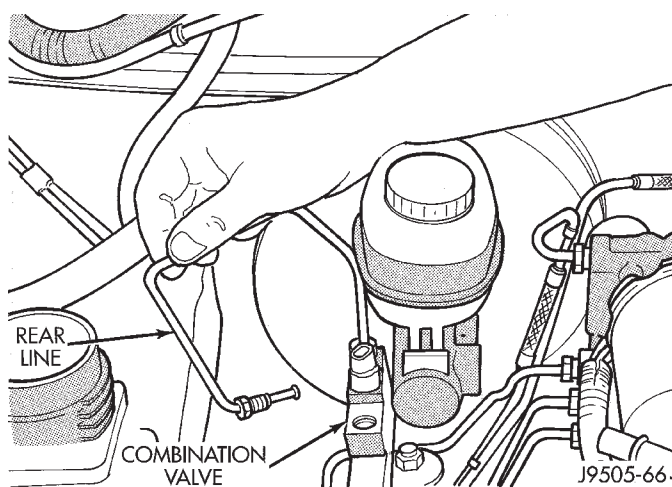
Disconnecting Master Cylinder Rear Brakeline
